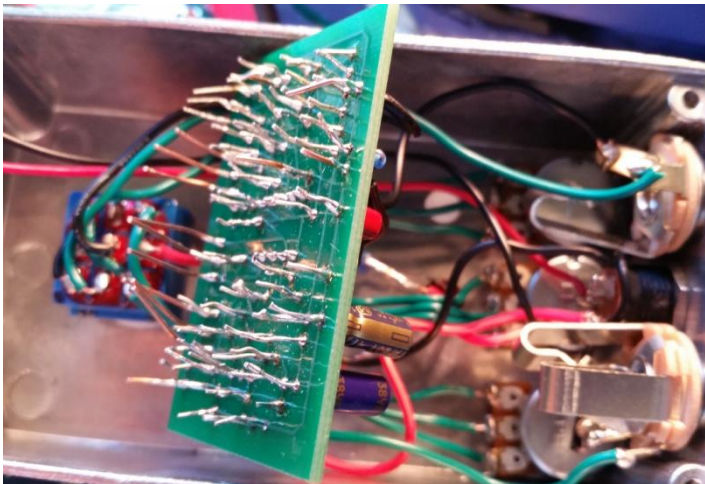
Components Mounted and Assembled Inside Enclosure
